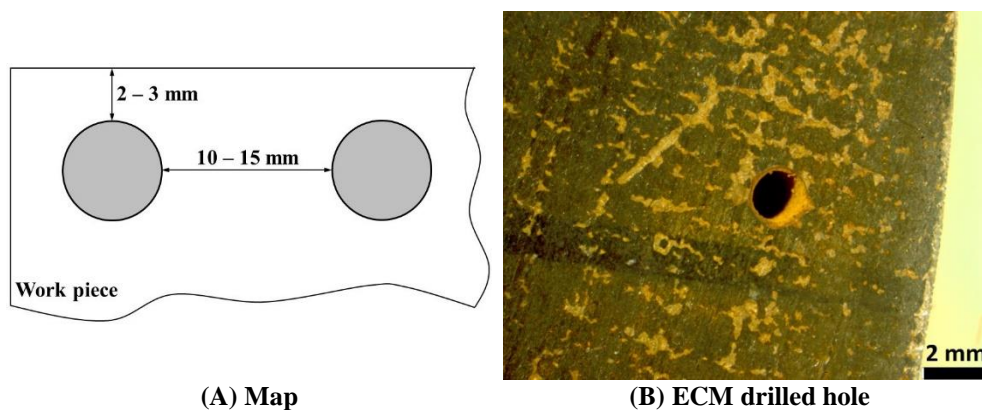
A) The map of hole positioning close to the sheet edge, B) drilled hole close to the sheet edge (the hole was obtained in test number 10 according to Table 2)
